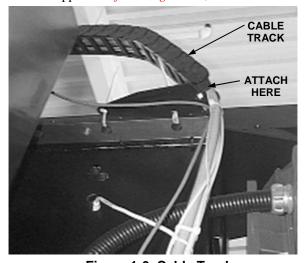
, Cable Track 12. Wipe all protective shipping oil and grease from machine.
